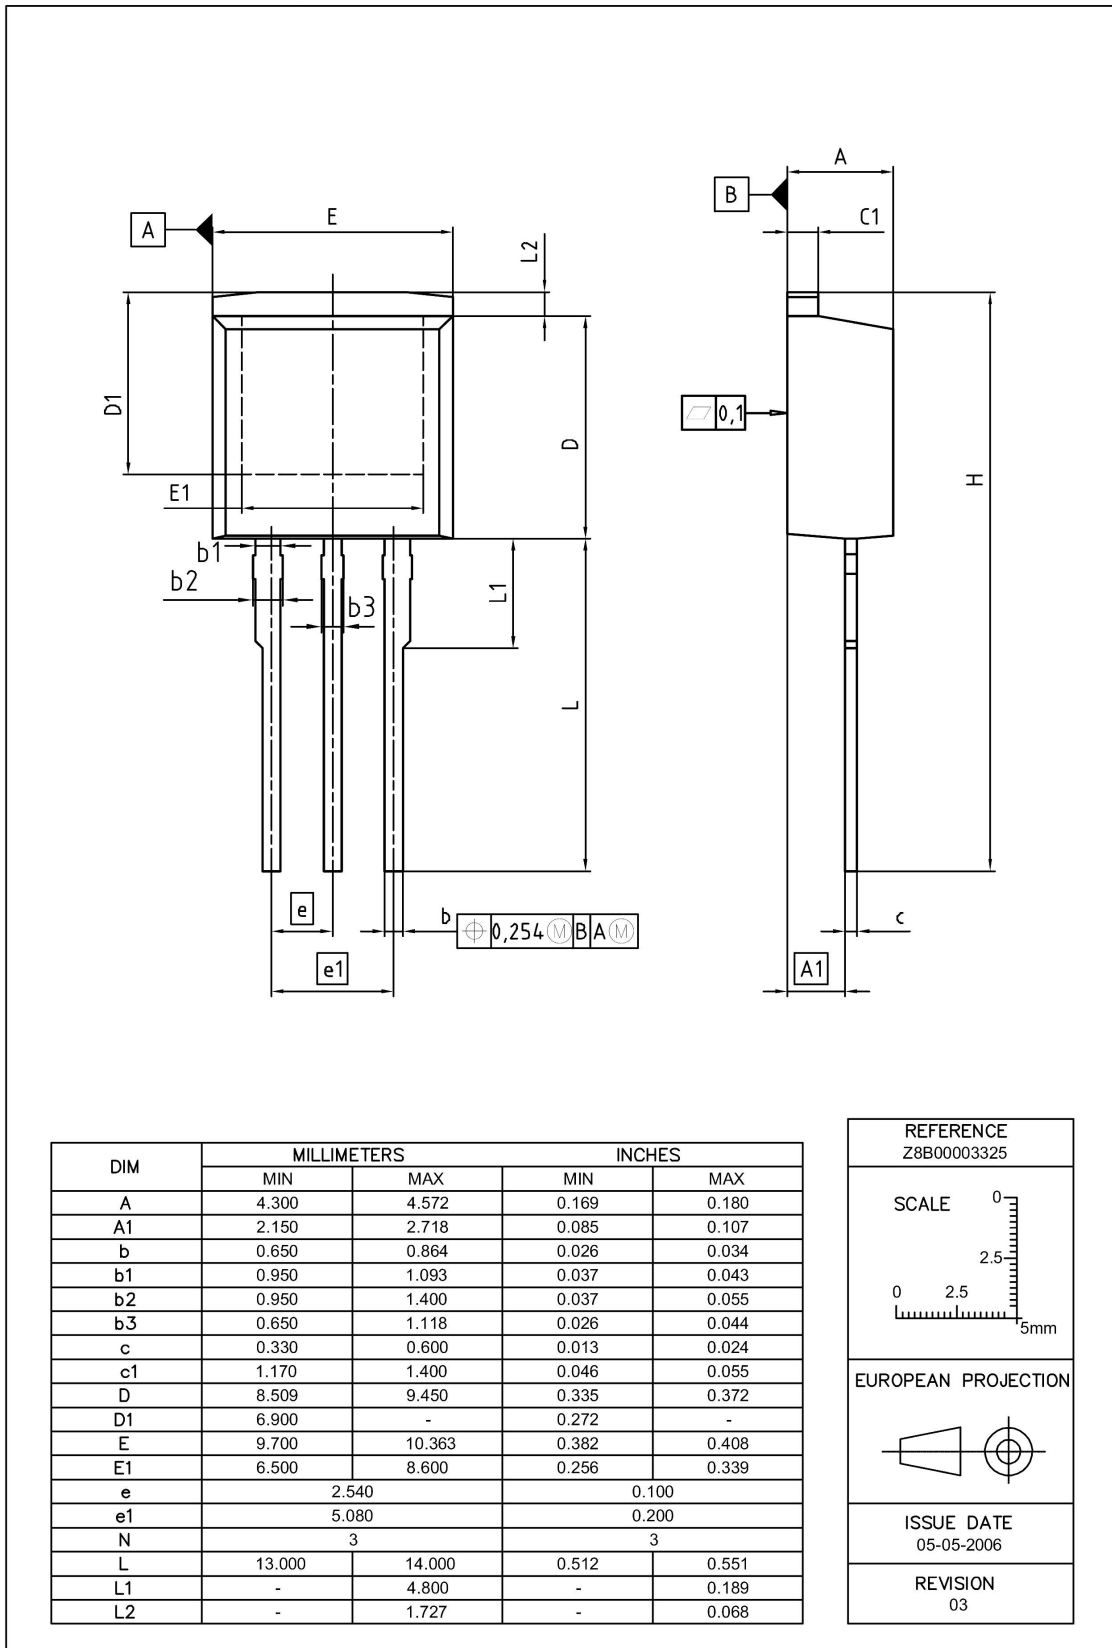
Outline PG-TO 262, dimensions in mm/inches
